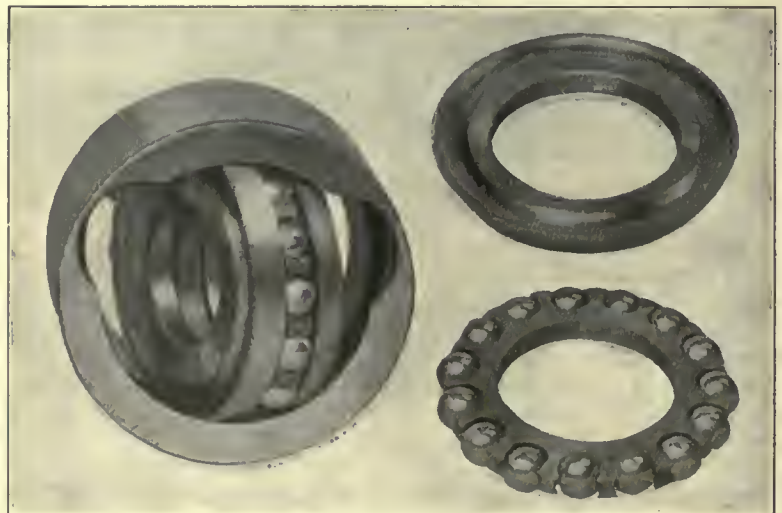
PERSPECTIVE VIEW OF SKEFKO THRUST BEARING, PARTLY DISASSEMBLED.
